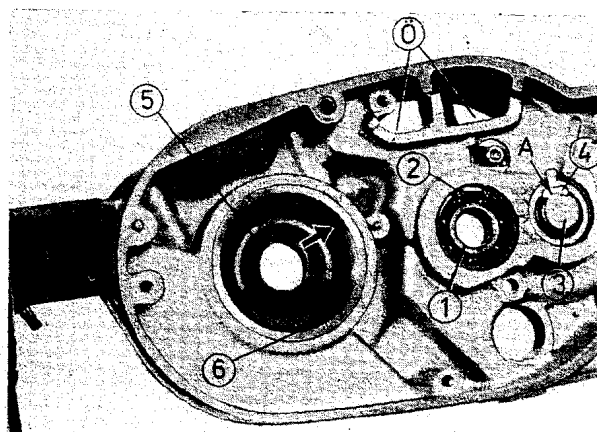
Left-hand housing half - oil guide plate and gearbox bearing
